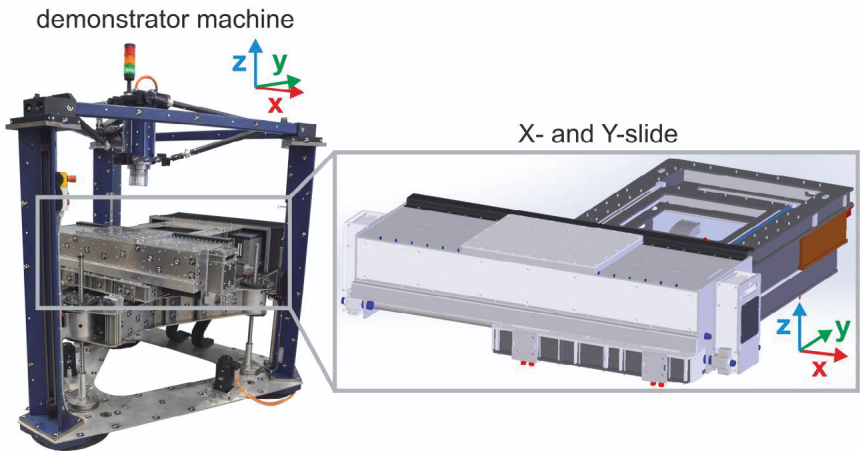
on the left side demonstrator machine and on the right side CAD model of X- and Y-slide
